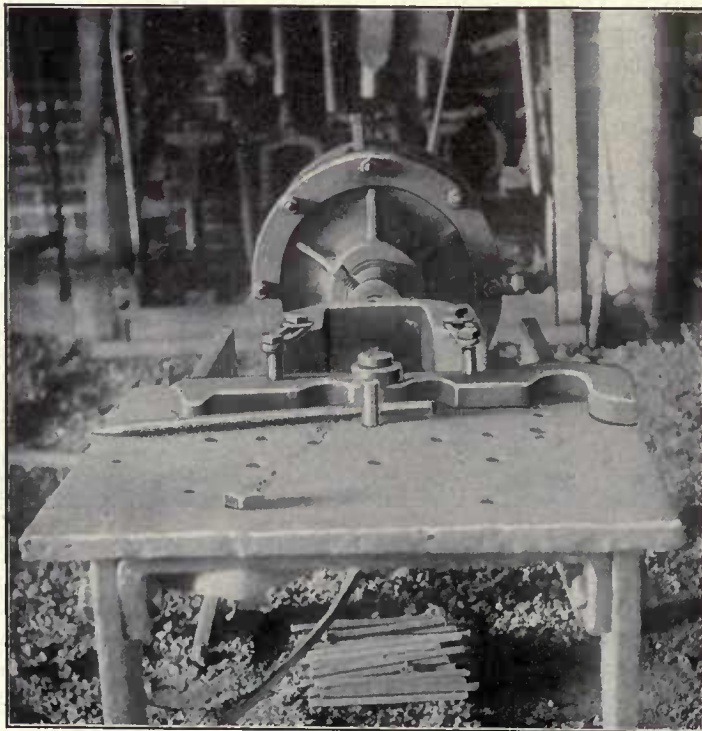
Material in Position Ready to Bend Coal Gate Hook.
